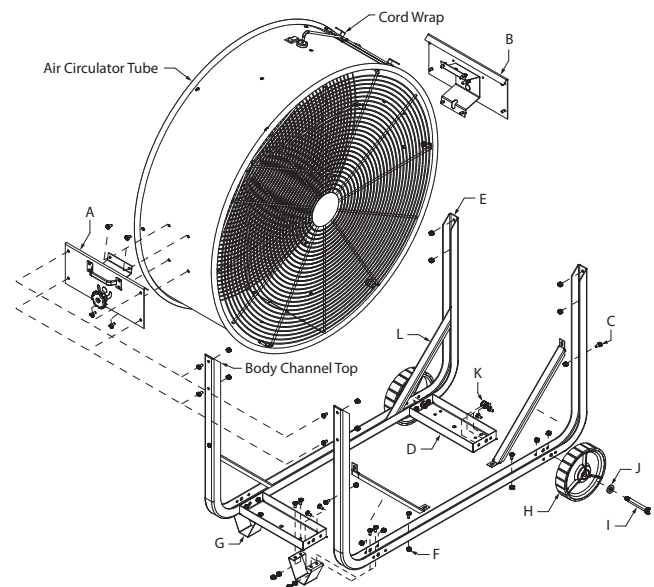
Mobile Tilttable Carriage Kit Assembly
